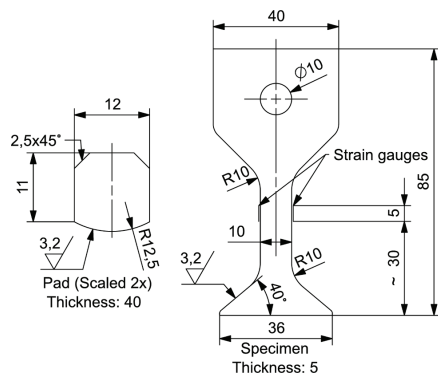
Geometric details of the specimen and contact pad used in this paper. General tolerances are in accordance with ISO 2768-m. Units are in millimetres.
